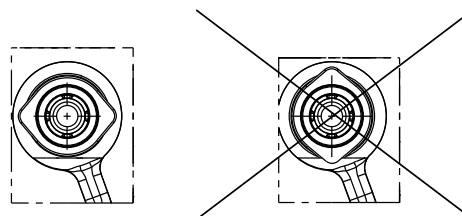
Fitting the stationary shaft seal part (only SiC/SiC)
